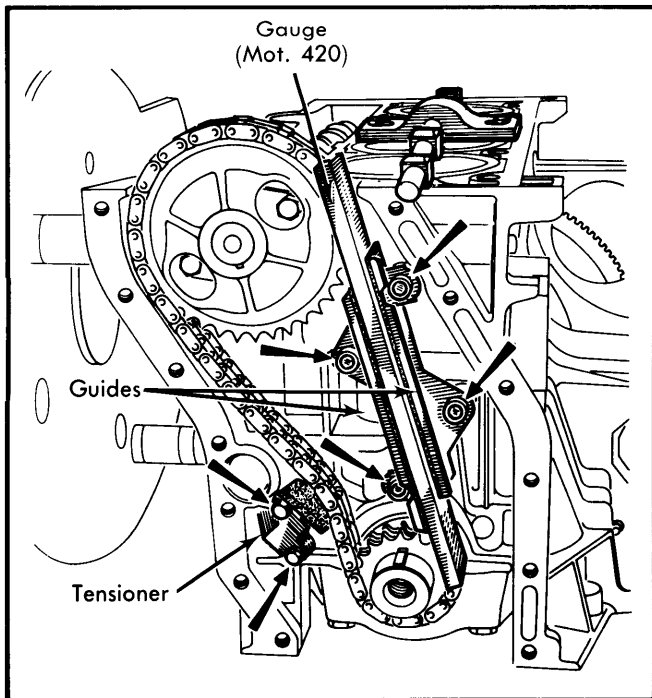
Adjusting Timing Chain Tension Using Gauge. Broad Arrows Indicate Tensioner & Guide Bolts.
